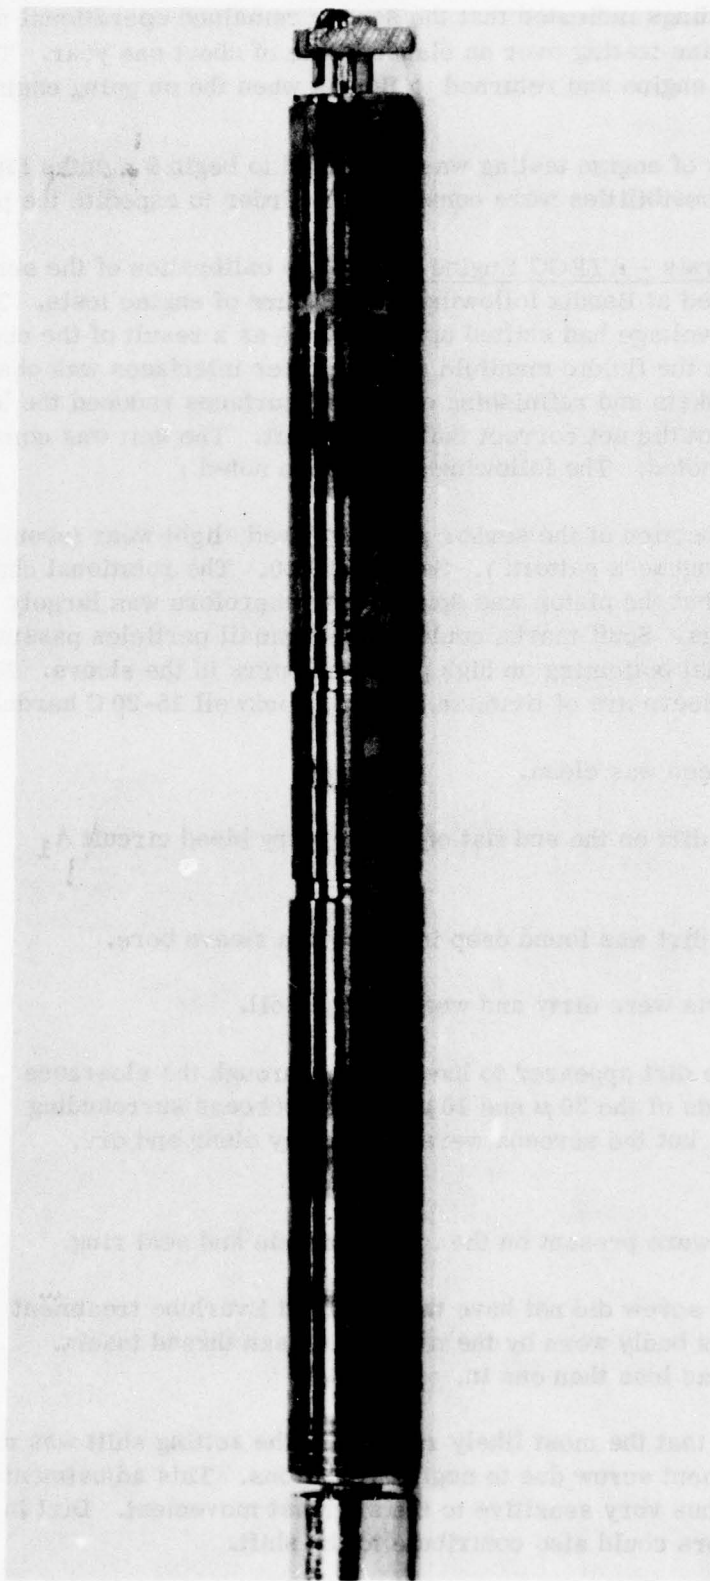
Enlarged View of the Piston Assembly After ATEGG Engine Running
